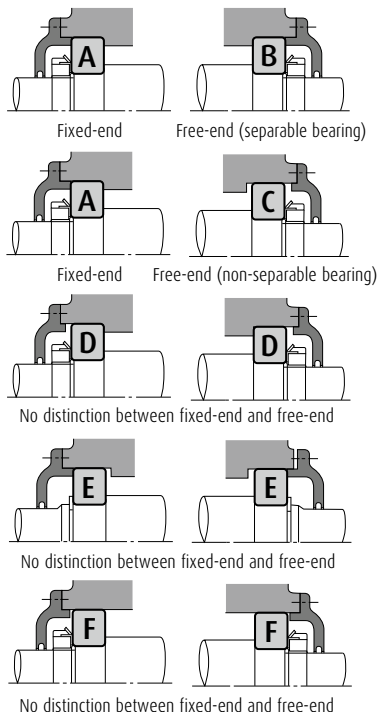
Bearing Mounting Arrangements and Bearing Types
